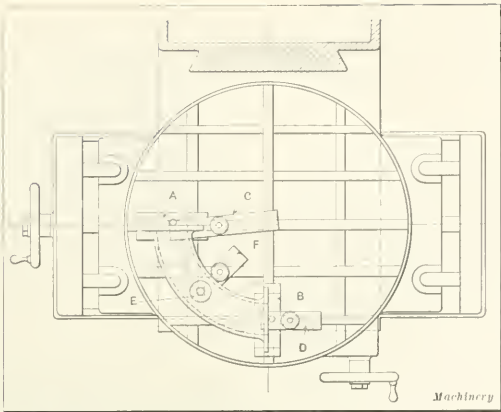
Method of setting up Work on Circular Attachment of Milling Machine
